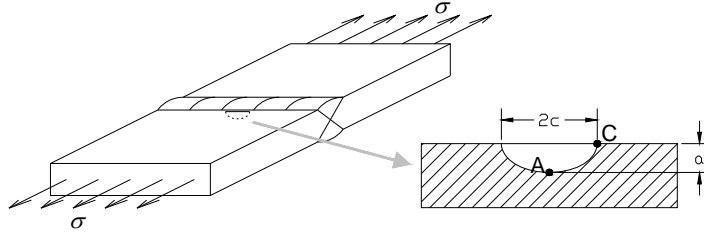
A semi-elliptical crack in a steel plate at/near the weld toe.
